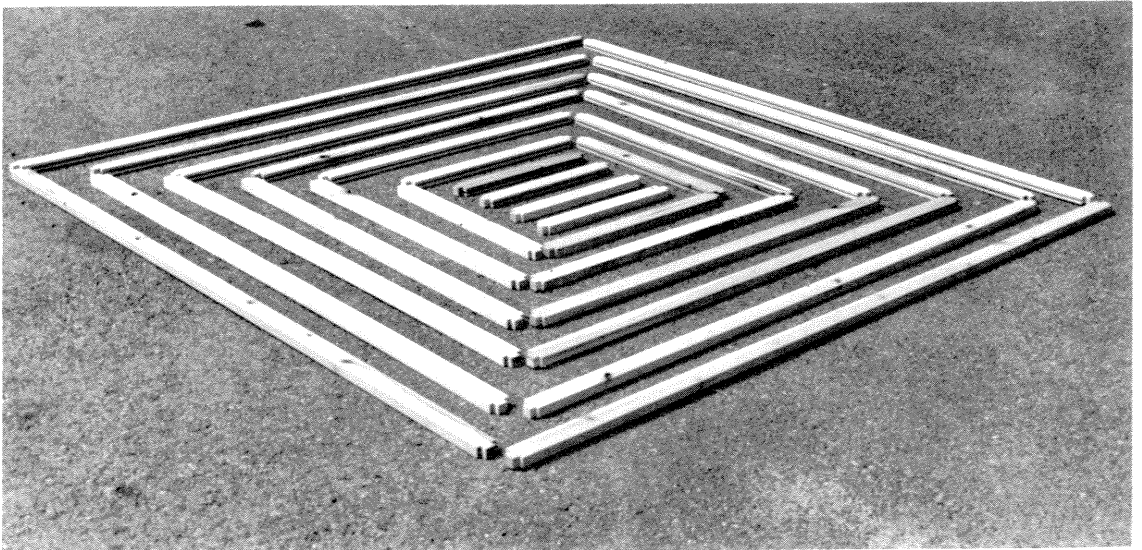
Interior furniture parts. All of a standard thickness and width, but of different lengths, these parts have been tenoned and grooved and are ready for use.
